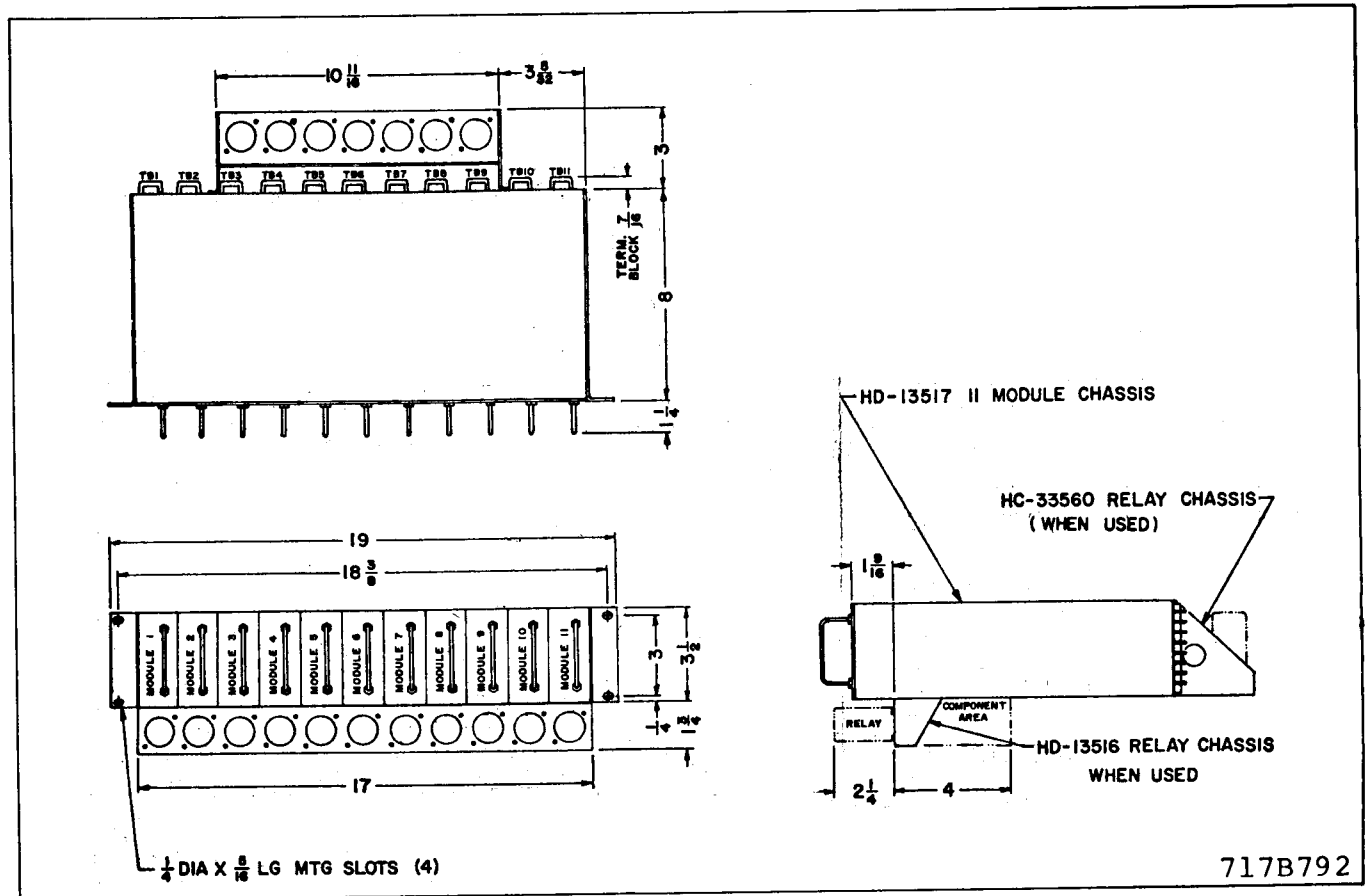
Outline and Drilling Plan of 11 Module Chassis
